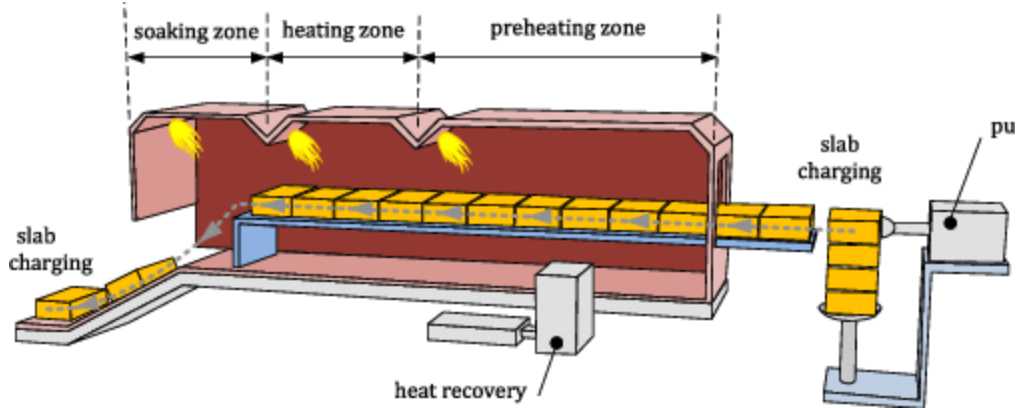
Pusher-type reheat furnace mechanism reproduced from (Feliu et al., 2014)
